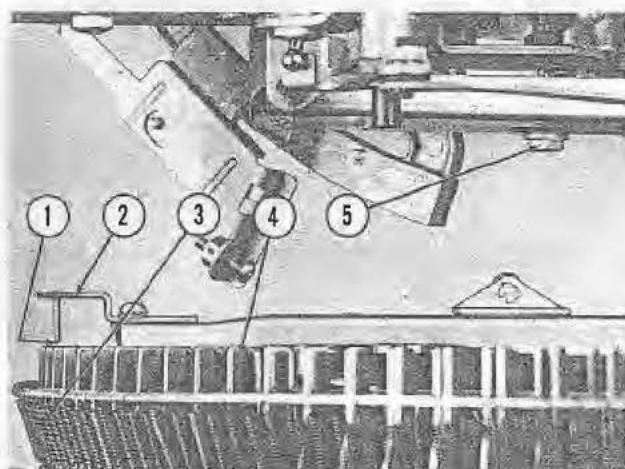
SELECTOR CRANK CLEARANCE ADJUSTMENT, 2400, 2410
